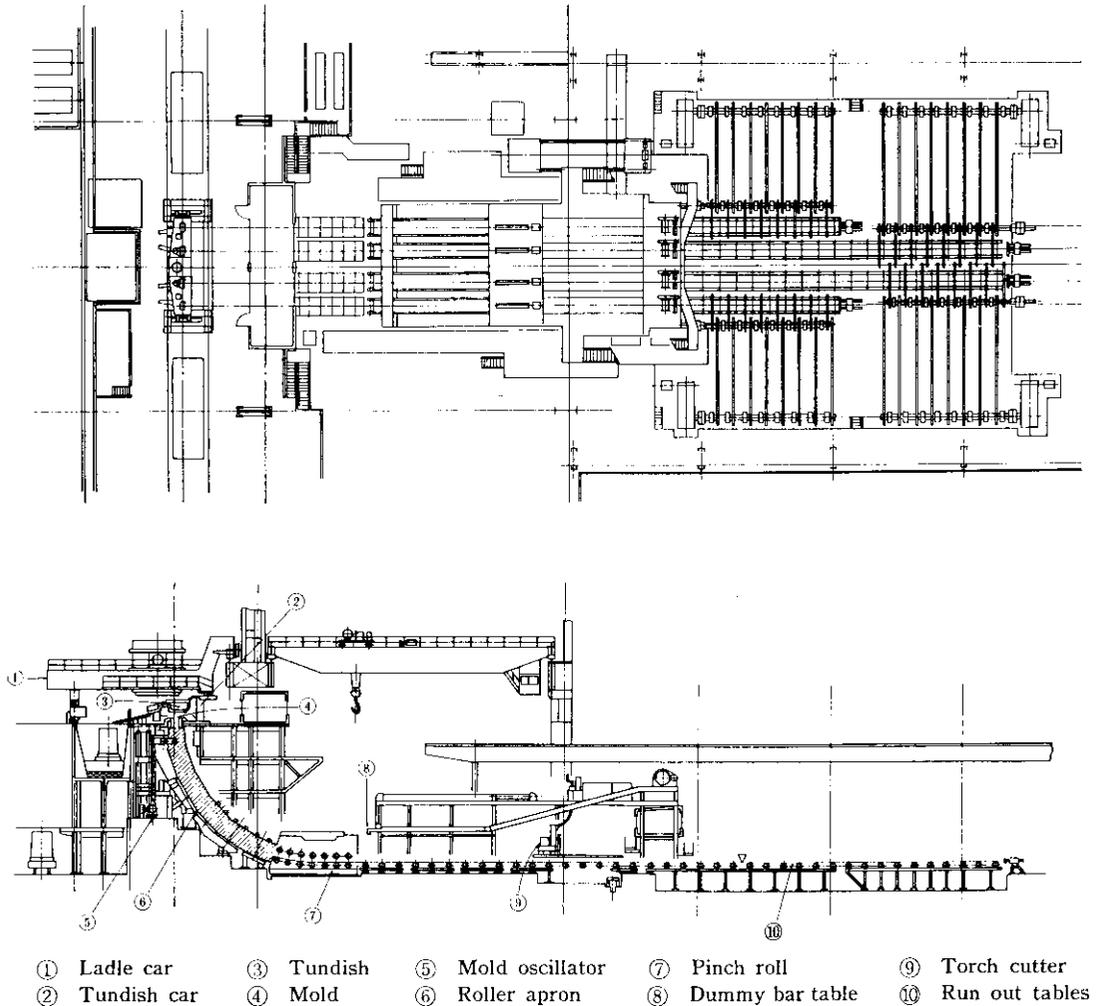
No. 3 CCM (Continuous casting machine) general layout
